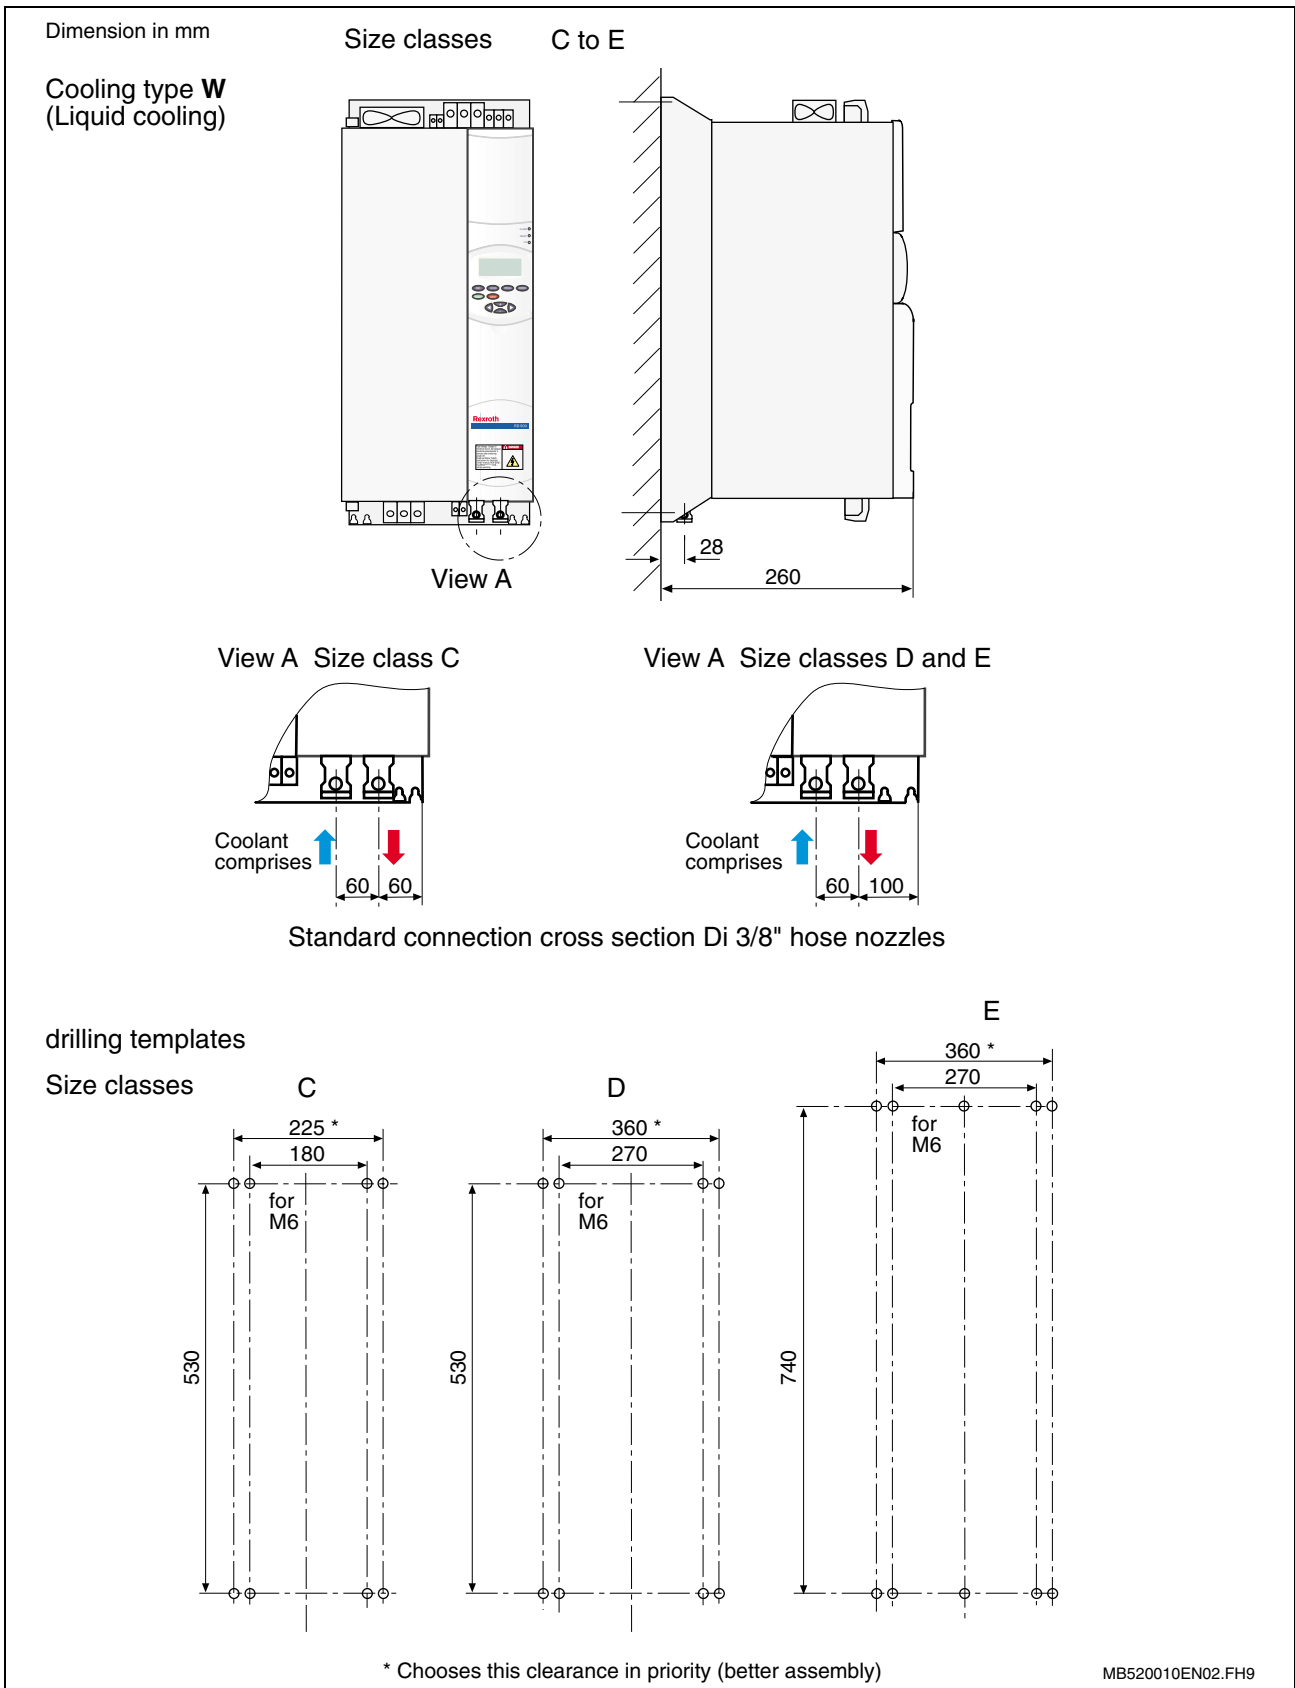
Dimension sheet for cooling type W, size classes C, D, E
